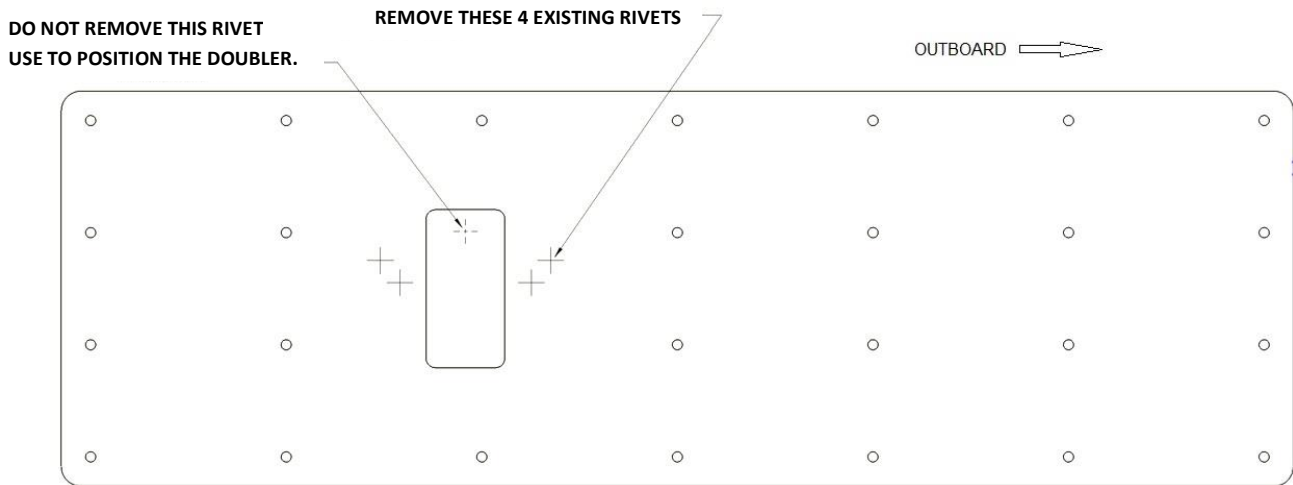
Four rivets to drill out in outboard flap false spar (RH shown, LH mirrored)
